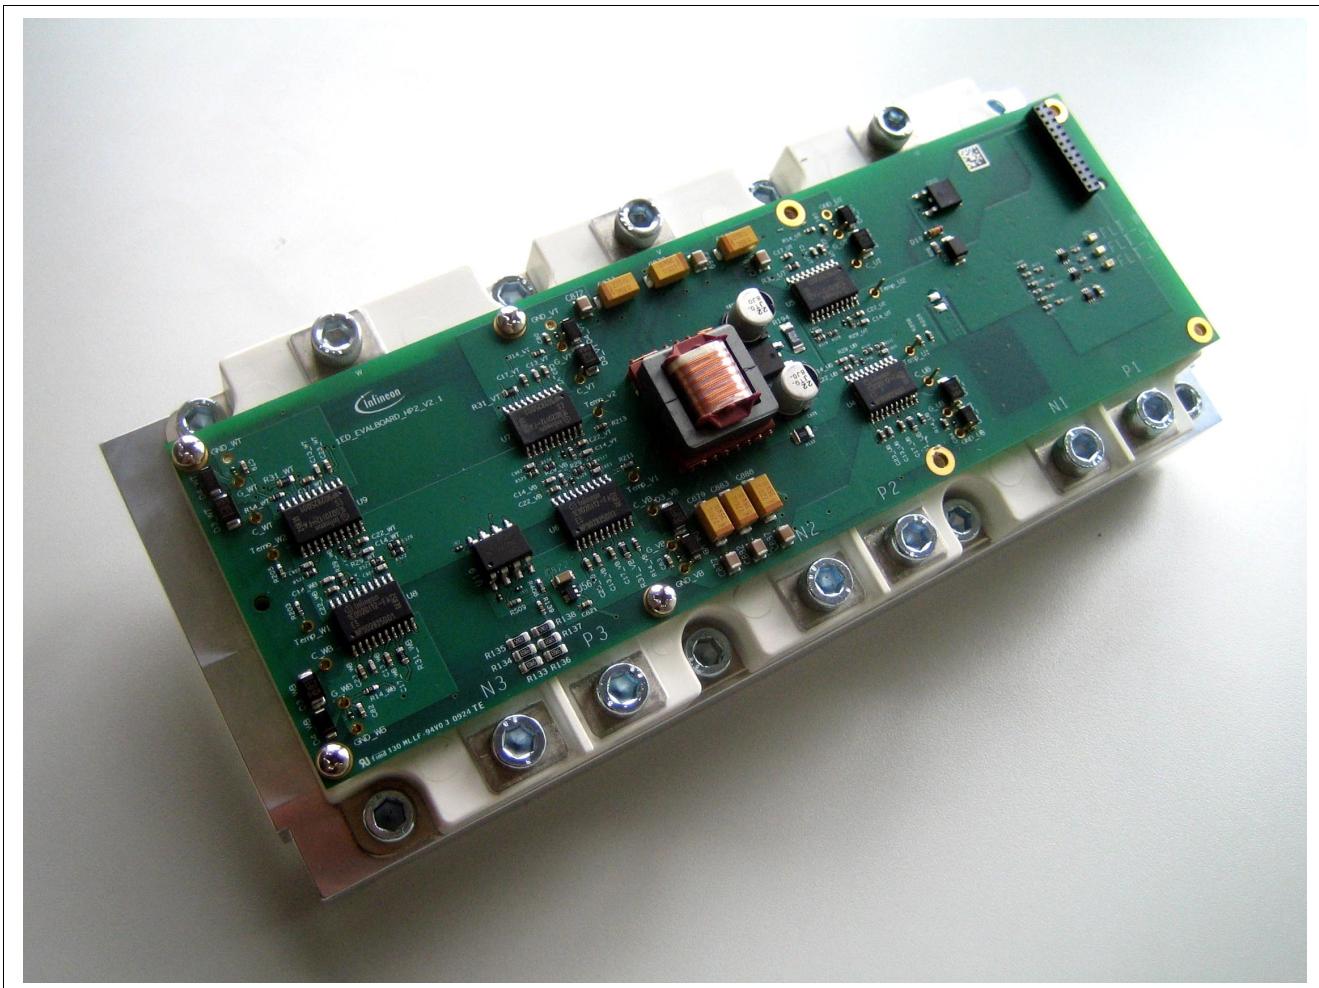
Driver Board Mounted on the Top of the HybridPACK™2 Module
